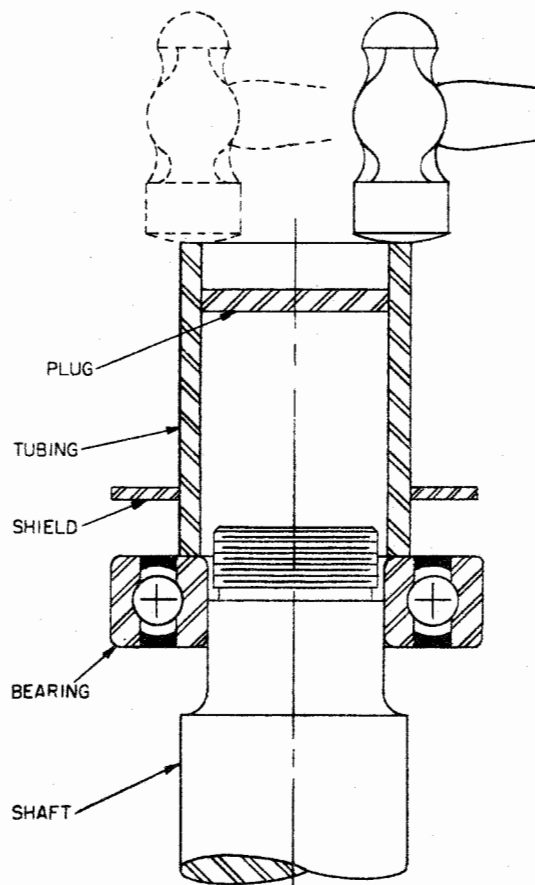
Hammer and Tube Method of Mounting a Bearing
